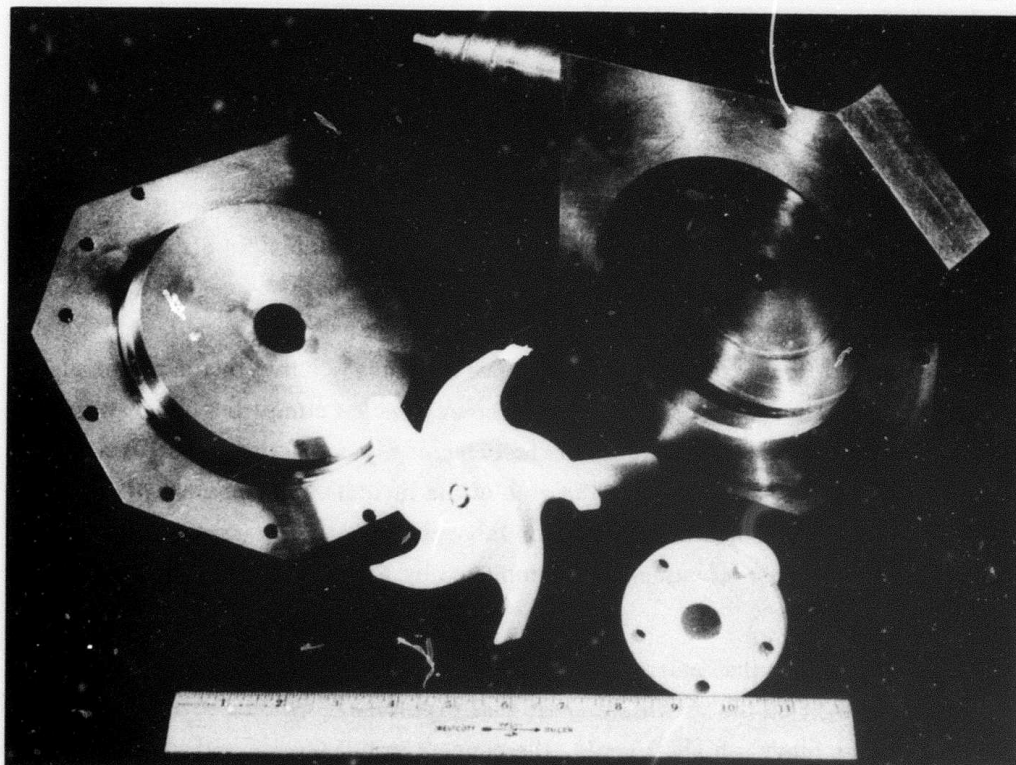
Circulatory Pump, Disassembled, Showing the Impeller, Housing, Involute, Shaft and Bushing
